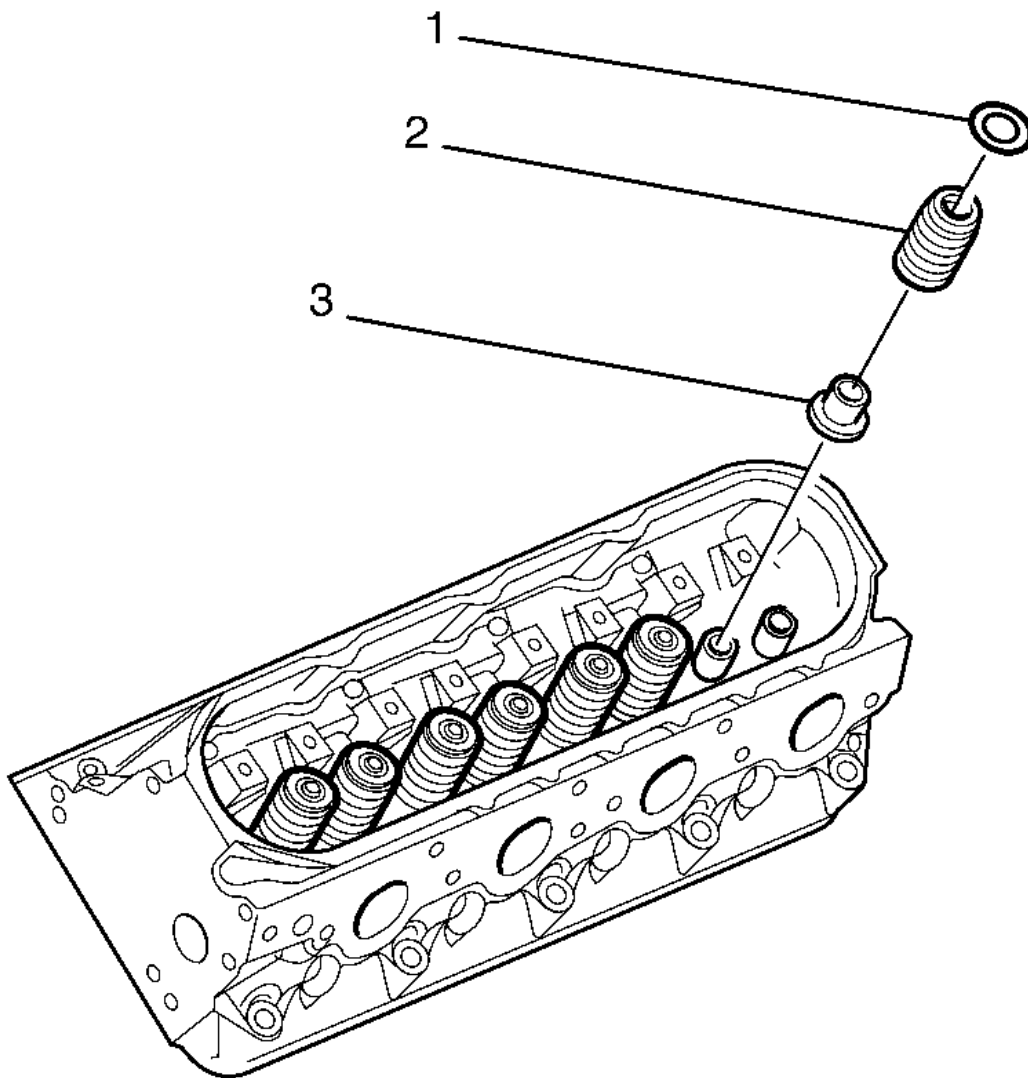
Locating Valve Stem Oil Seal, Valve Spring & Cap
